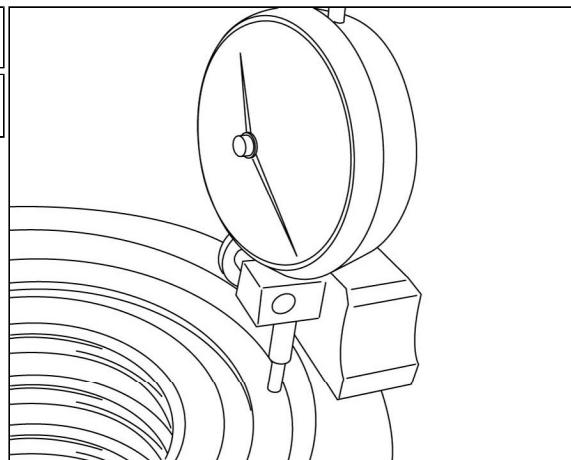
Clearance of the output shaft tapered roller bearings - 2
